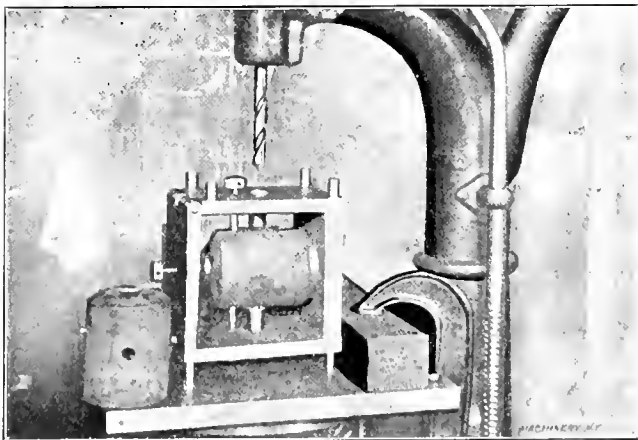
Jig for Drilling the Wrist-pin Hole in the Piston
